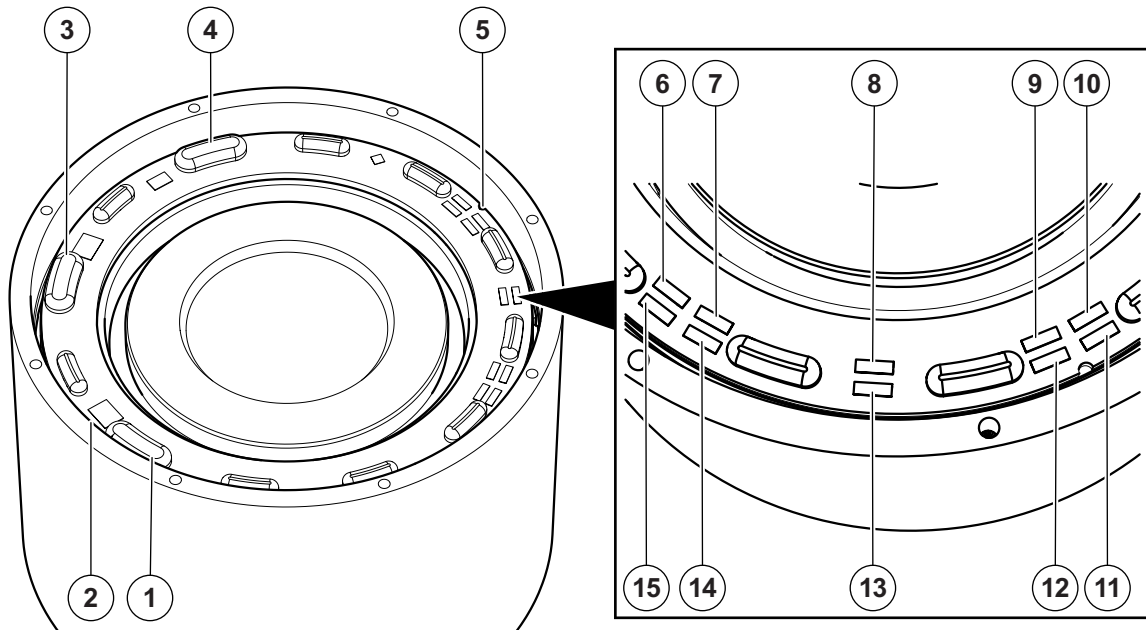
Overview of soldering pads on the TUAKA ACTIVE connection board (example illustration)
